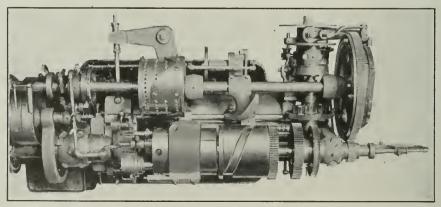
Cleveland Automatic Turret Machine (Plan View)
